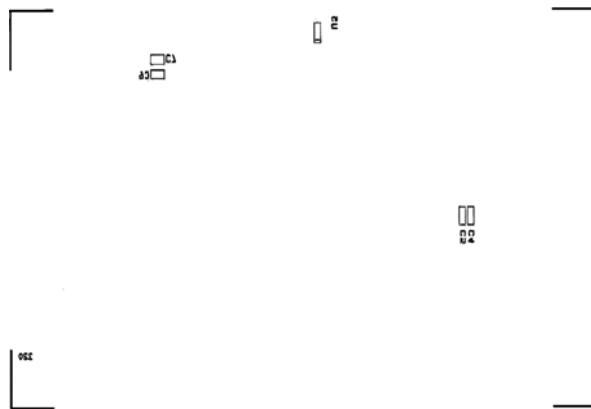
PCB component (*bottom*) layout of RFID and sensor unit of CO-monitoring device
